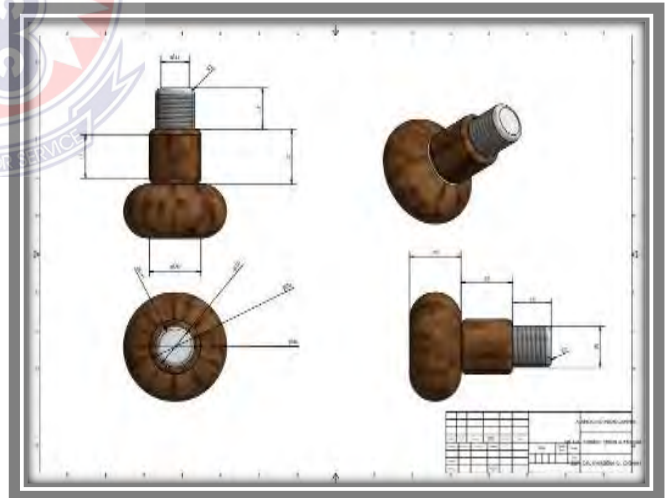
, SN 13C & 47: Handle for Main Piston and Movable Wheel Piston Port/Pump
